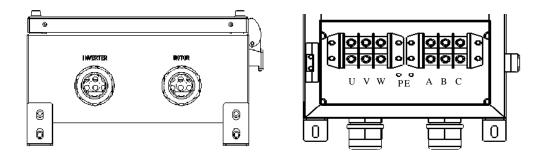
Bottom view of outlet filter Fig.3-3 Internal Terminal Close the bottom cover plate and lock catch when finish wire connection. And the bottom over plate in an open condition is strictly prohibited. Then the outlet filter connection has been completed.
